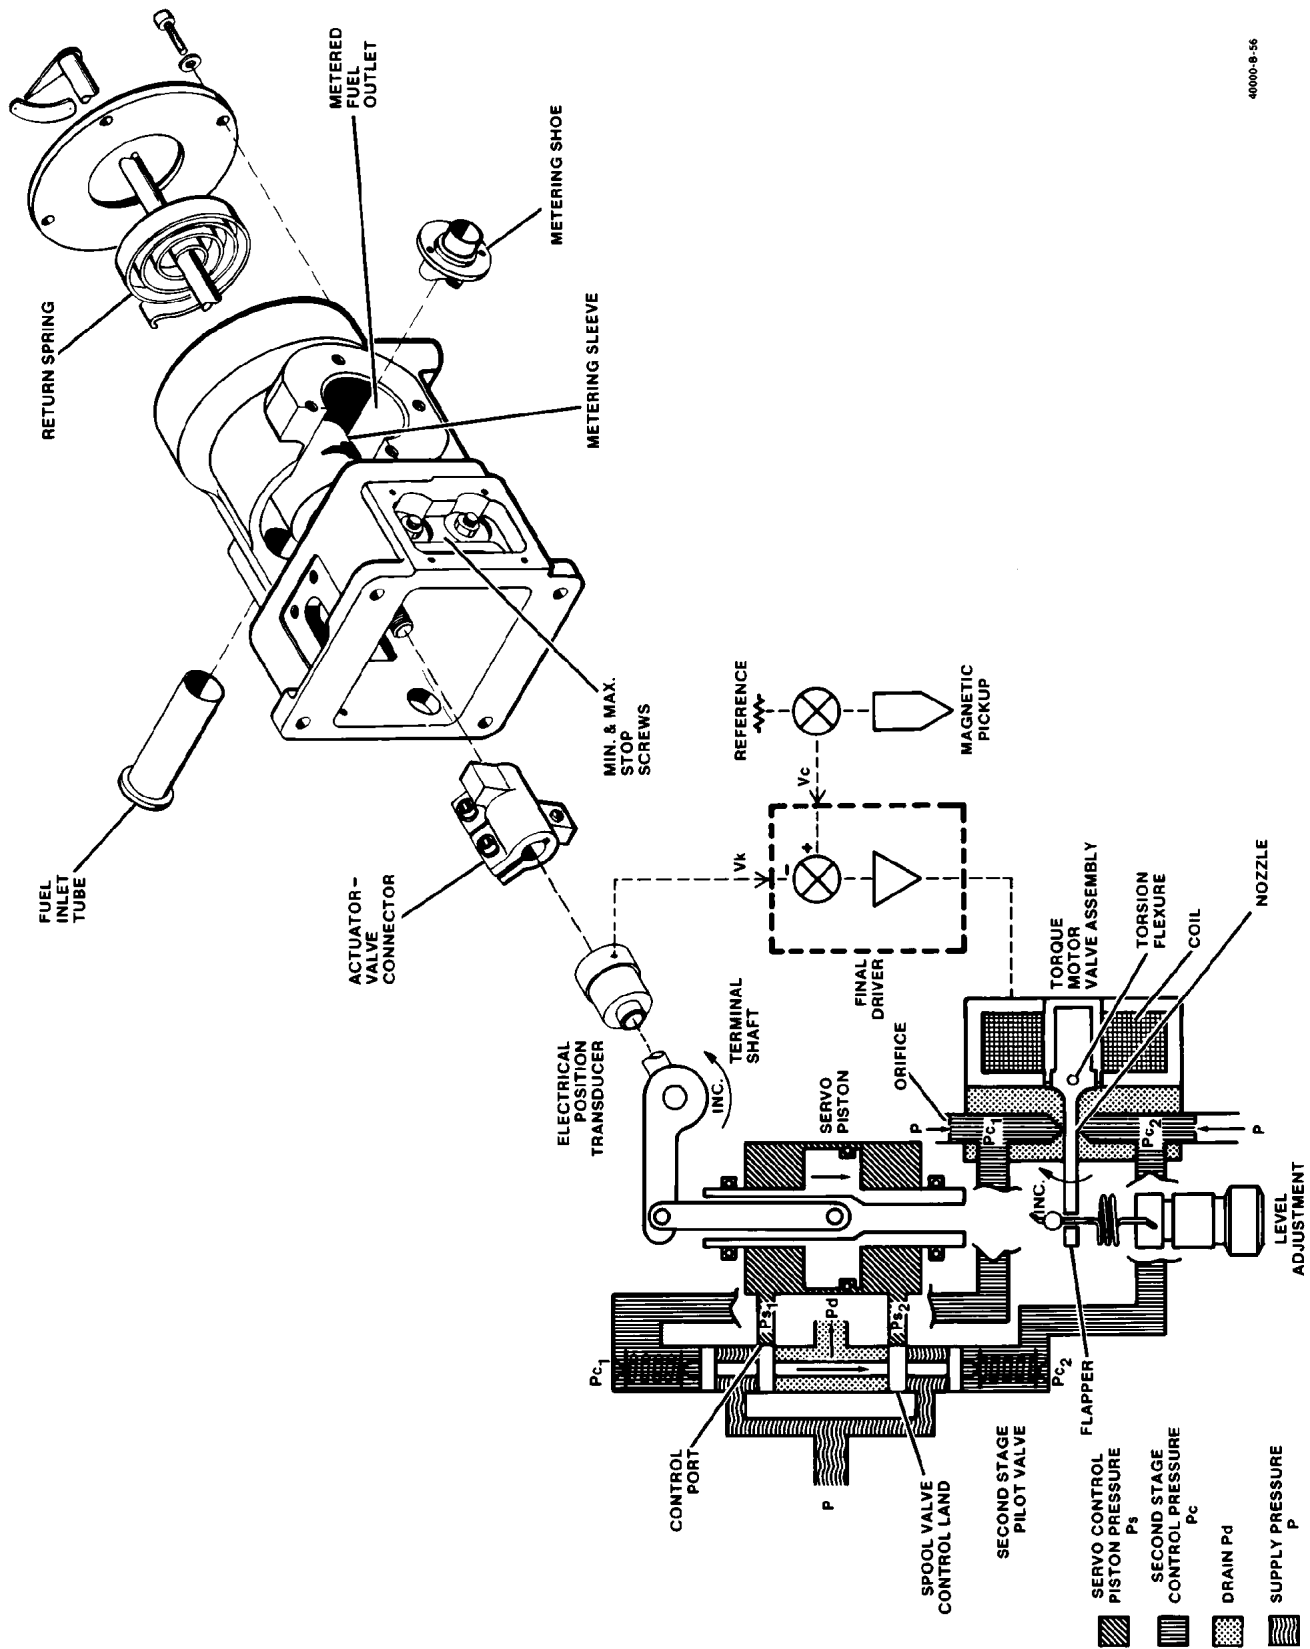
Schematic Diagram of 3171 Gas Valve/TM-55 Integrating Actuator
